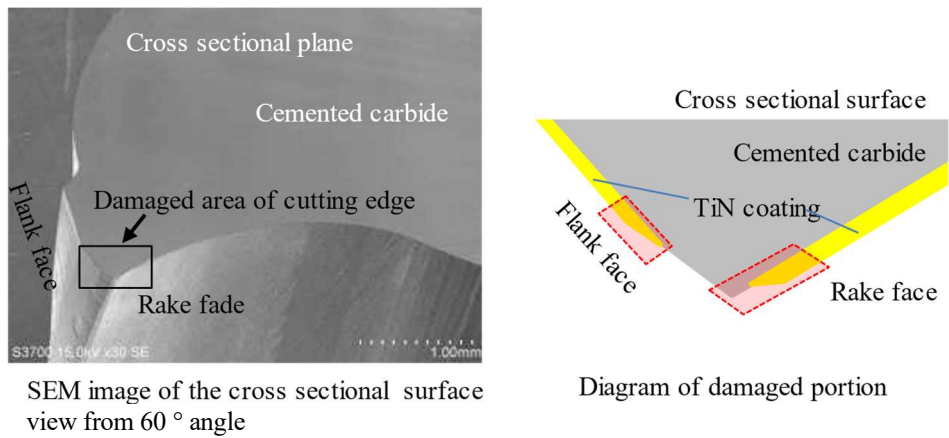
SEM image of the cross-sectional surface view from 60° angle and diagram of the damaged cutting edge on flank and rake faces.
